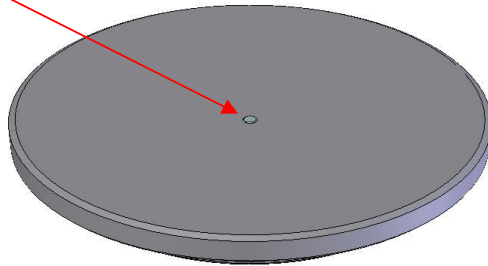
Top view of Quest ATR Diamond Crystal Puck Assembly
